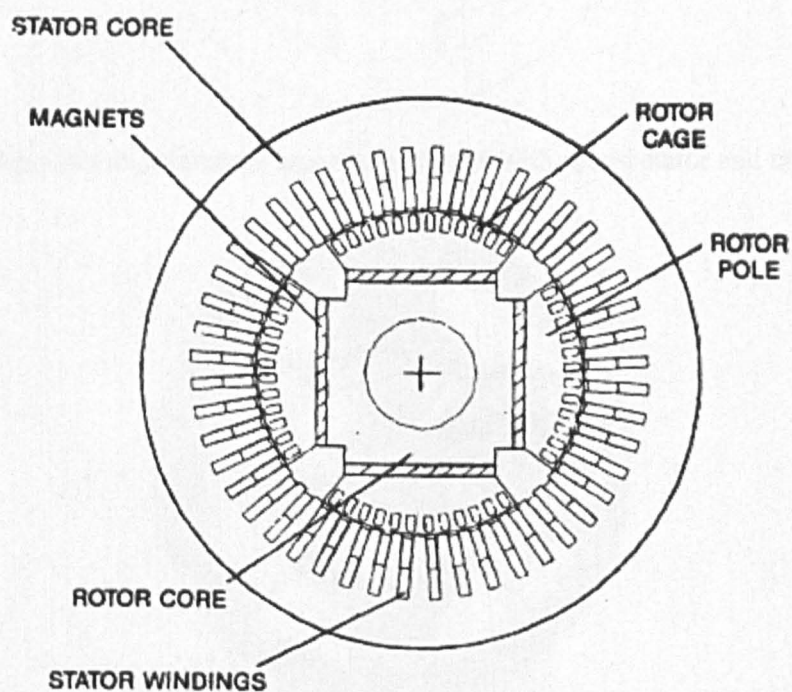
Line-start single-phase permanent magnet machine cross-section [54].
